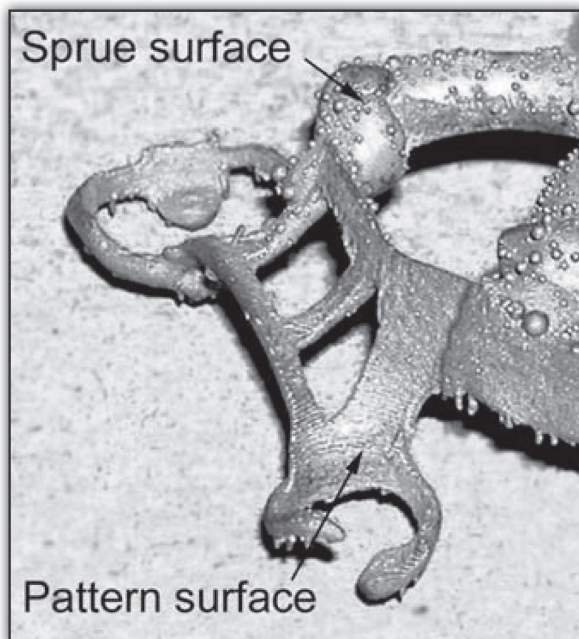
Surfaces of the unfinished Amethyst® pattern cast
